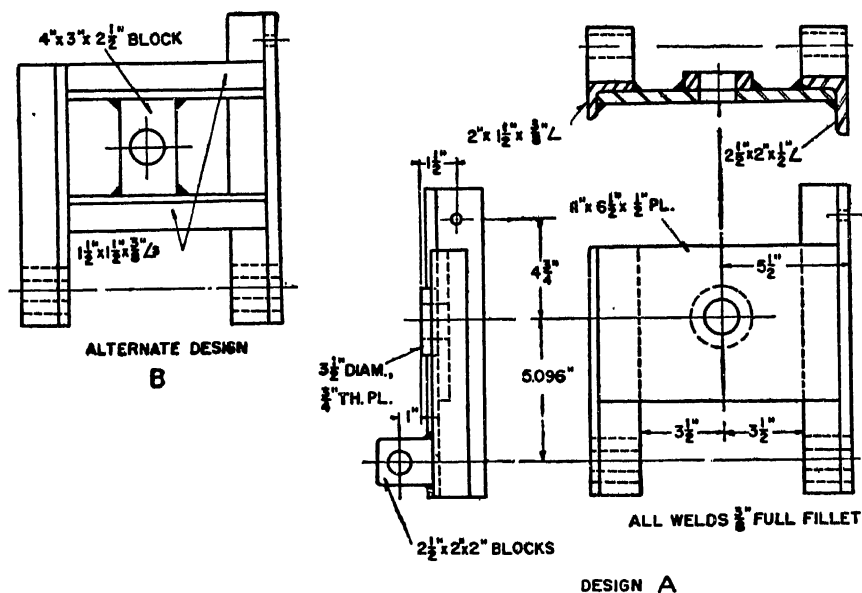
Arc-welded End Brackets for Winch.
